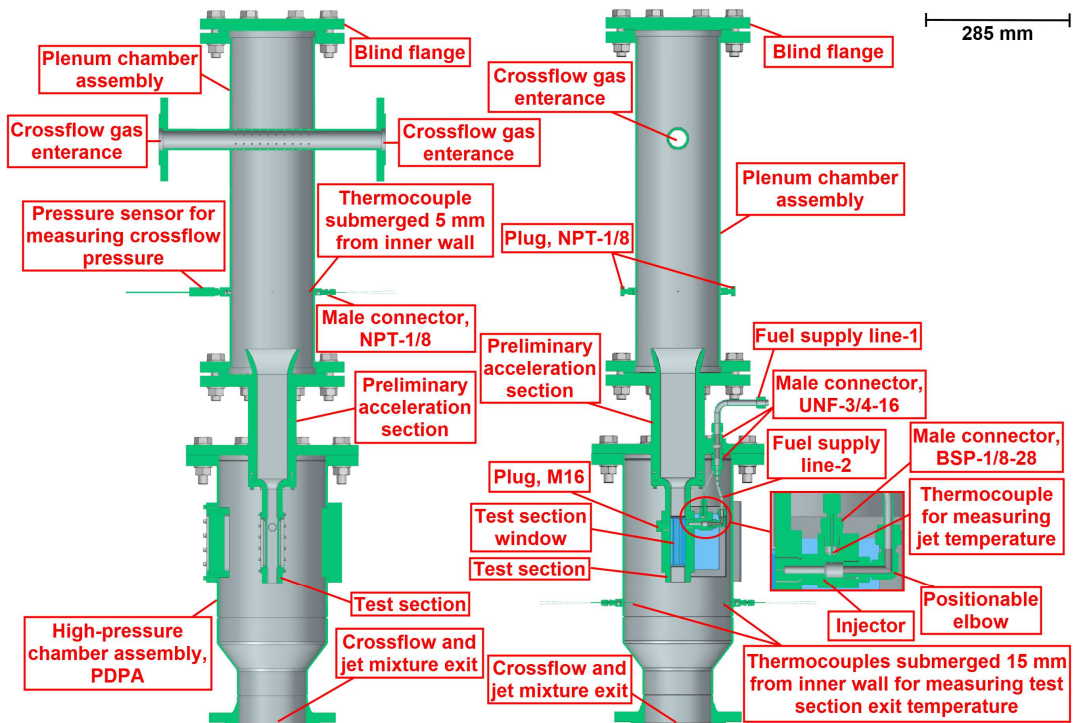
PDPA Test setup assembly (cross-sectional view 1 and 2).
